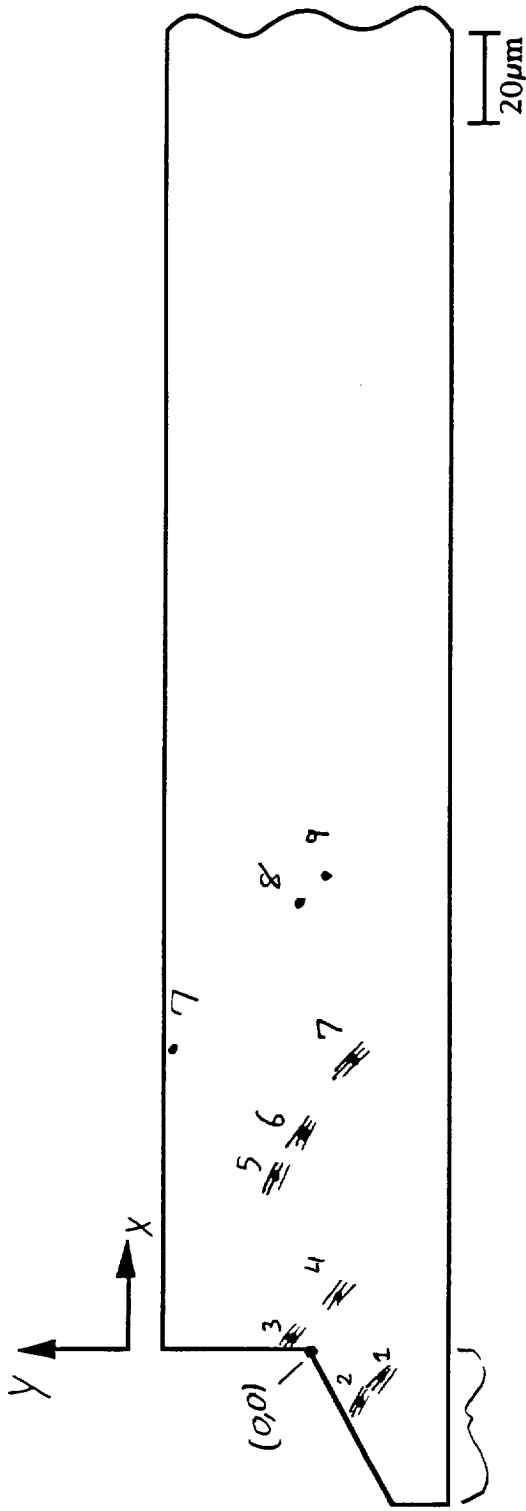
Rivet hole schematic: Upper rivet row, hole number 3J15, fatigue crack growth is in the aft direction.
